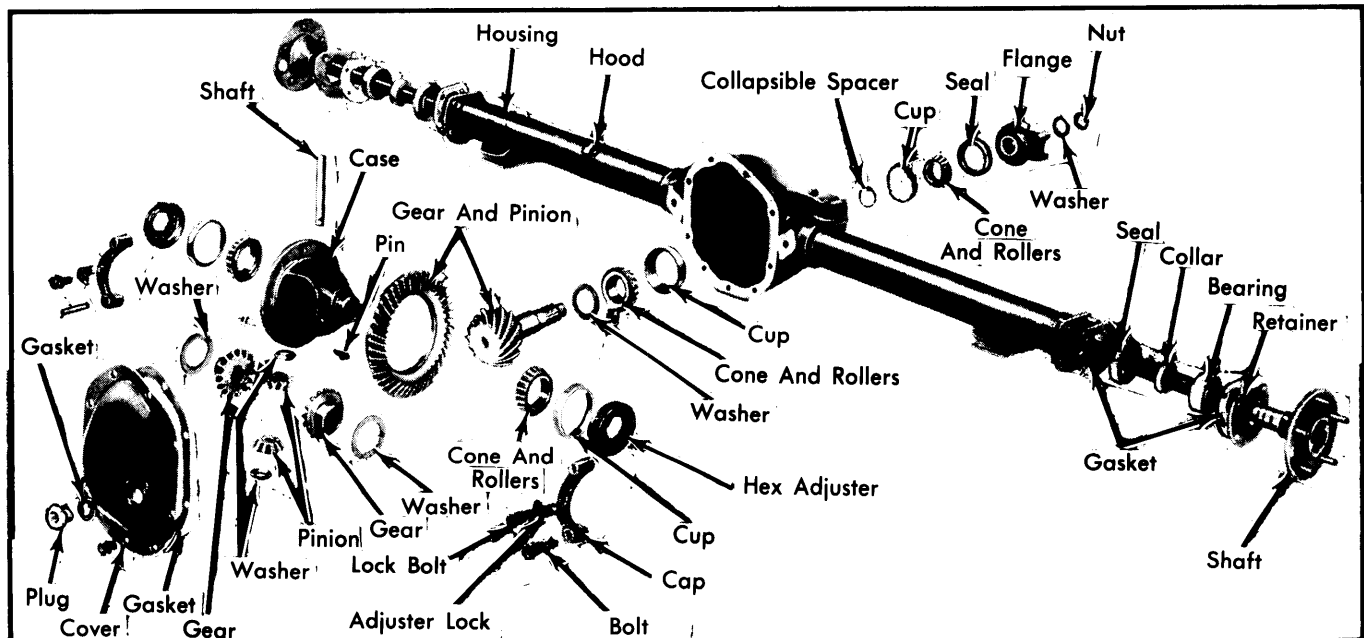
Exploded View of Chrysler Corp. 7 1/4" Rear Axle Assembly (Standard)
